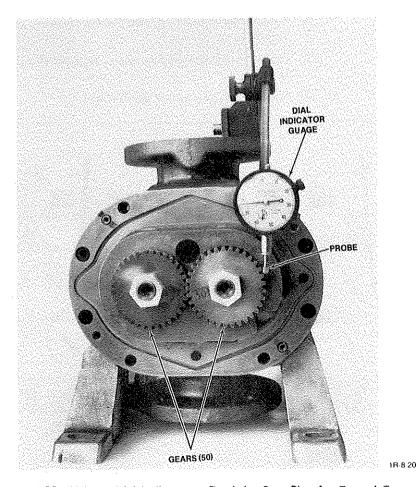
Using a Dial Indicator to Read the Gear Play for Reused Gears (WA-250 pump model shown).
